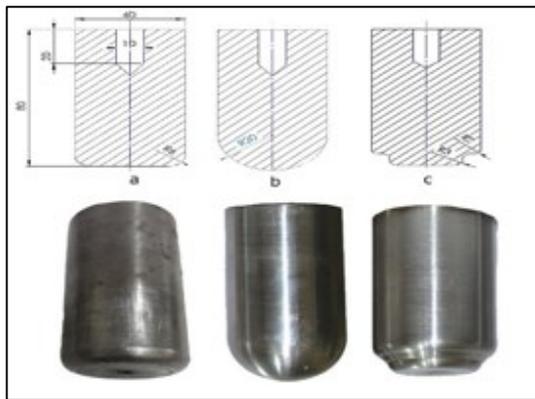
Cross-sectional view and manufactured former block (a. Flat, b. Hemispherical and c. Complex)
